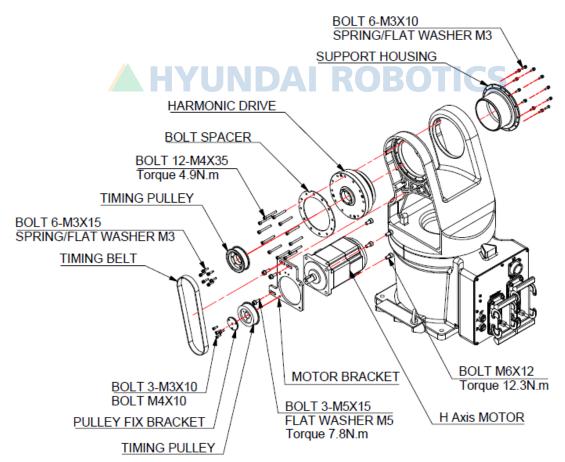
Axis-H Reducer Disassembly Diagram [HH007C]
